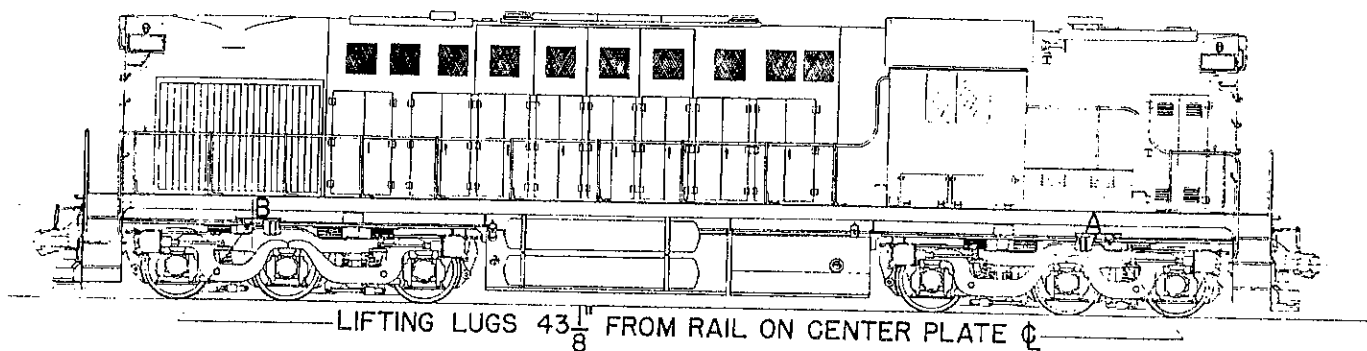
JACKING AND LIFTING - 1600 HP, SIX MOTOR ROAD SWITCHER
